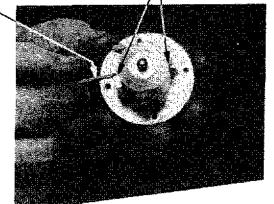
CHECKING THE VANES OF THE PENDULUM ASSEMBLY
